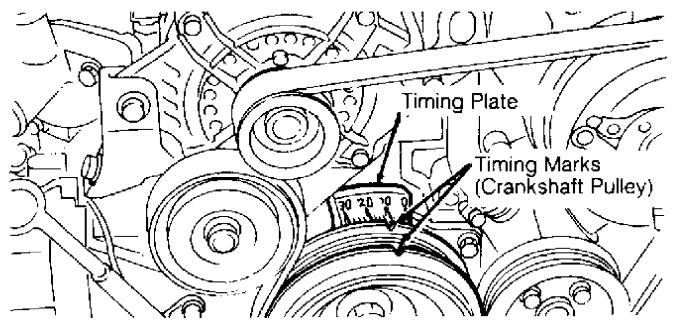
Locating Ignition Timing Marks - 6-Cylinder Courtesy of Subaru of America, Inc.
